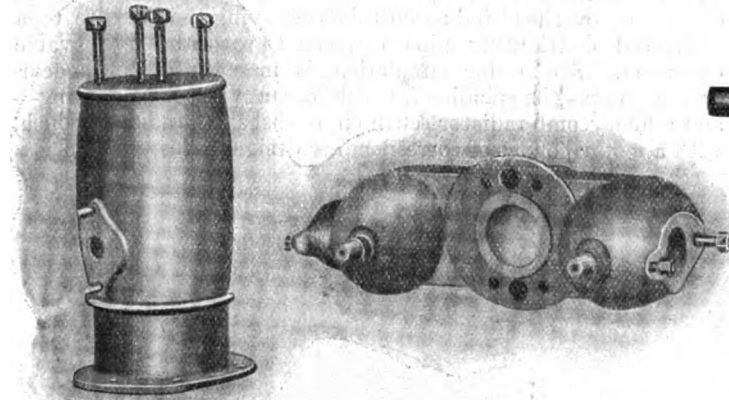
View of a Germain Steel Cylinder and separate Cast Iron Head.
